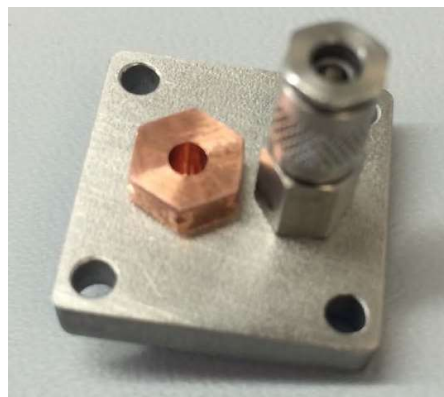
Example of a Traditionally Machined Fill Manifold Block
